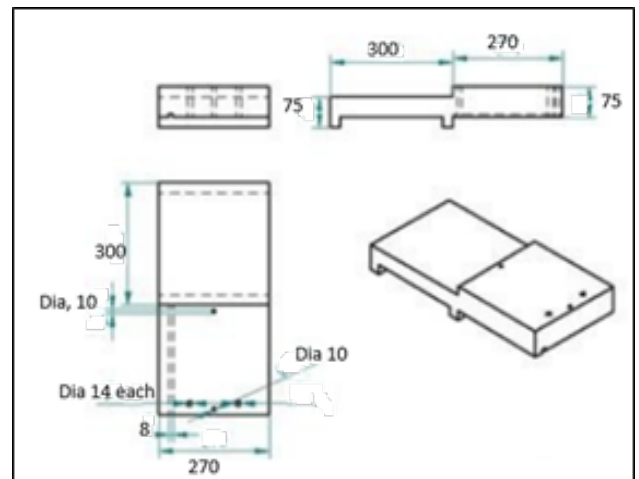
Wooden fixture drawing (All dimensions are in mm).
